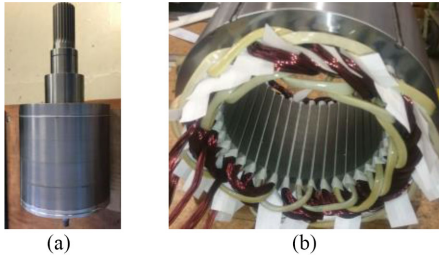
Prototype 8-pole/36-slot V-type IPM motors. (a) V-type rotor. (b) Stator.
